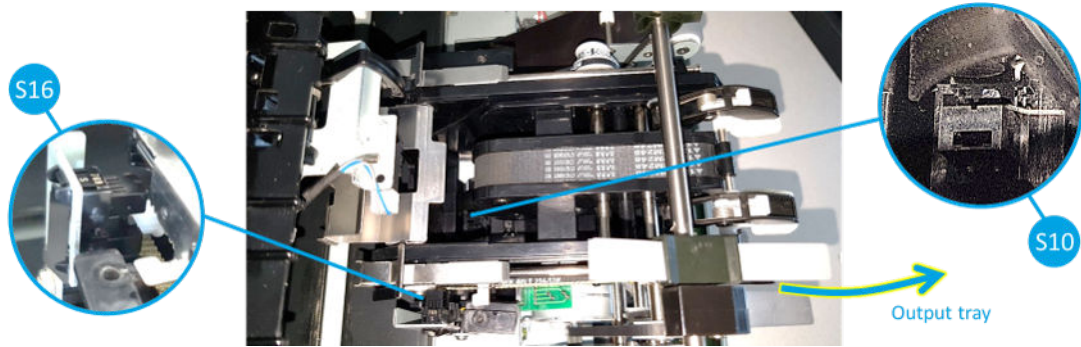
Inner finisher system - ejector unit detail view (3 of 3)
